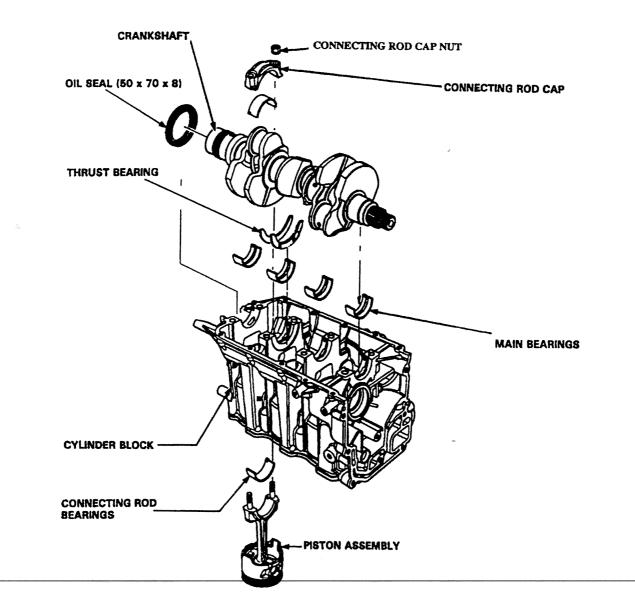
Cylinder Block, Crankcase and Pintons
